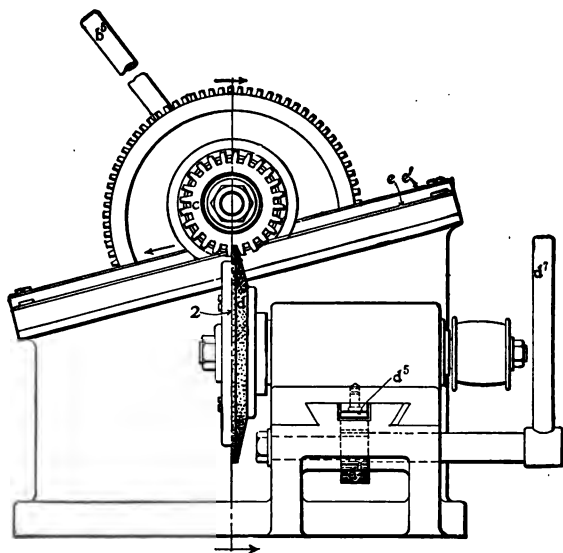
The Fellows Cutter and Bevel-gear Generator.
